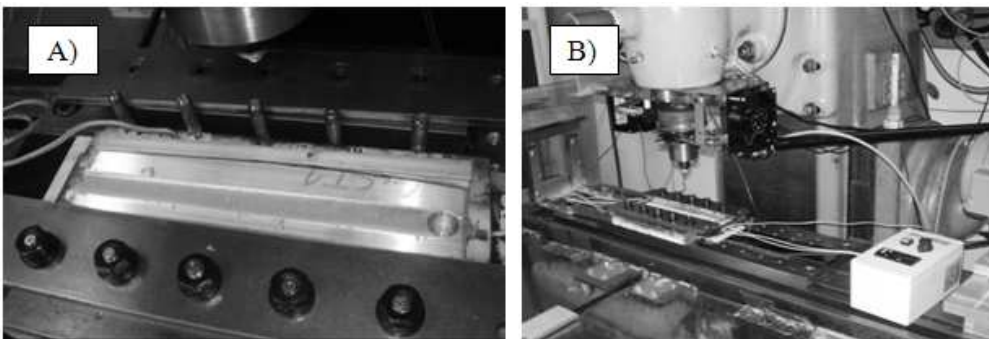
Heated FSW System (A) A picture of the anvil and clamping setup with one clamp removed. One of the J-type braided thermocouples can be seen in the aluminum. (B) The entire welding setup.
